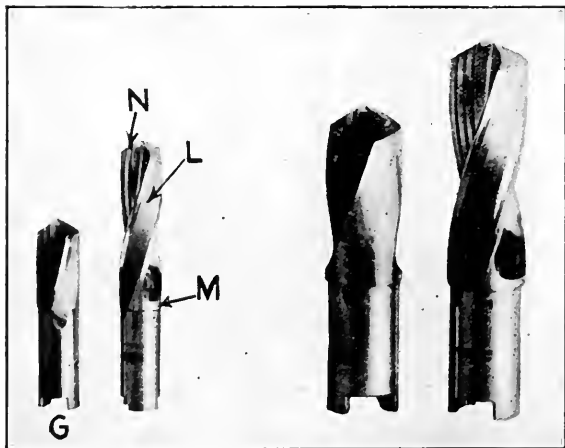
HOLLOW-SHANK DRILLS USED IN DRILLING OPERATION
